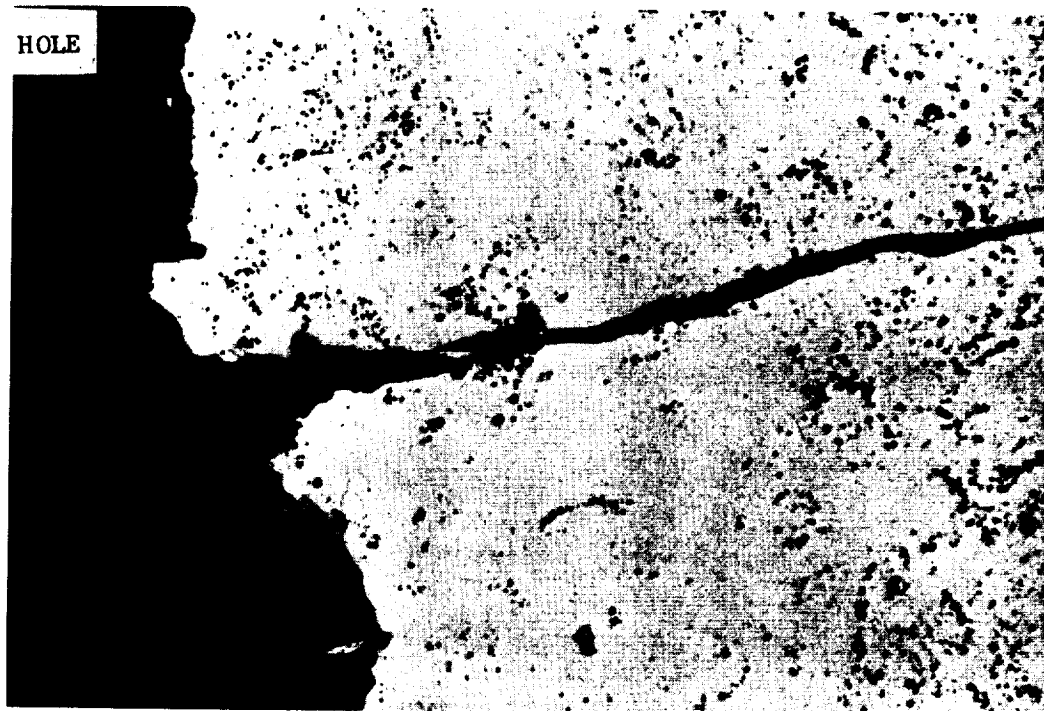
HOLE DRILLED WITH DULL DRILL SHOWING RADIAL CRACKING AND BRIDGING FROM HOLE TO HOLE
